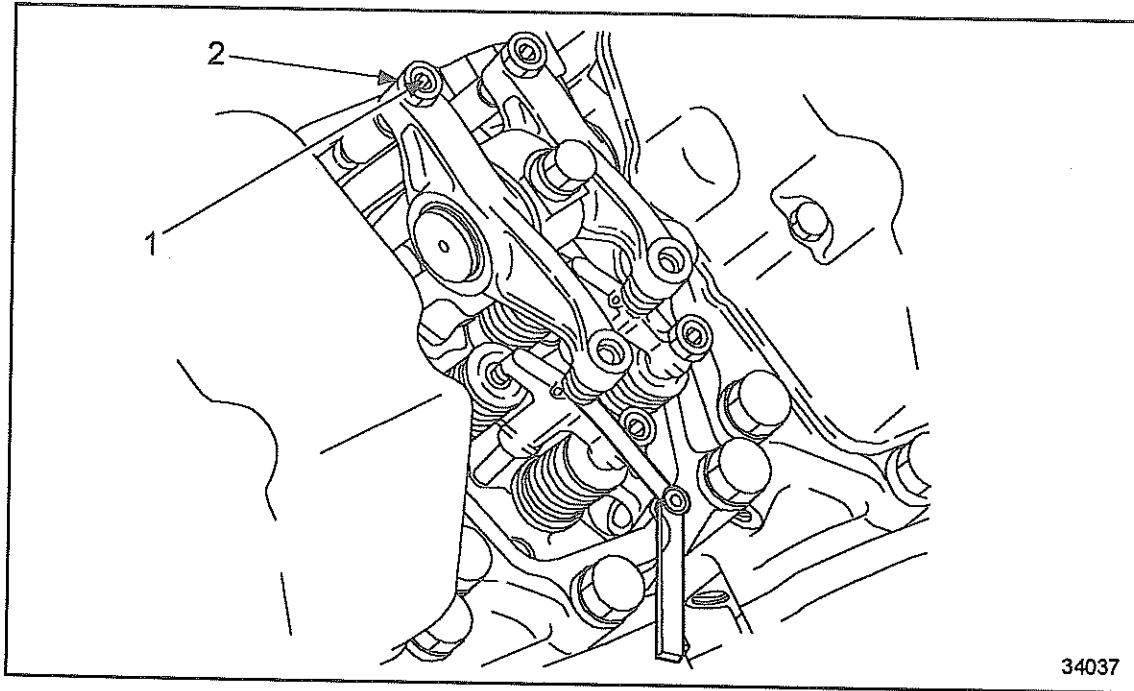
Inspecting Valve Clearance in Two Crankshaft Positions
